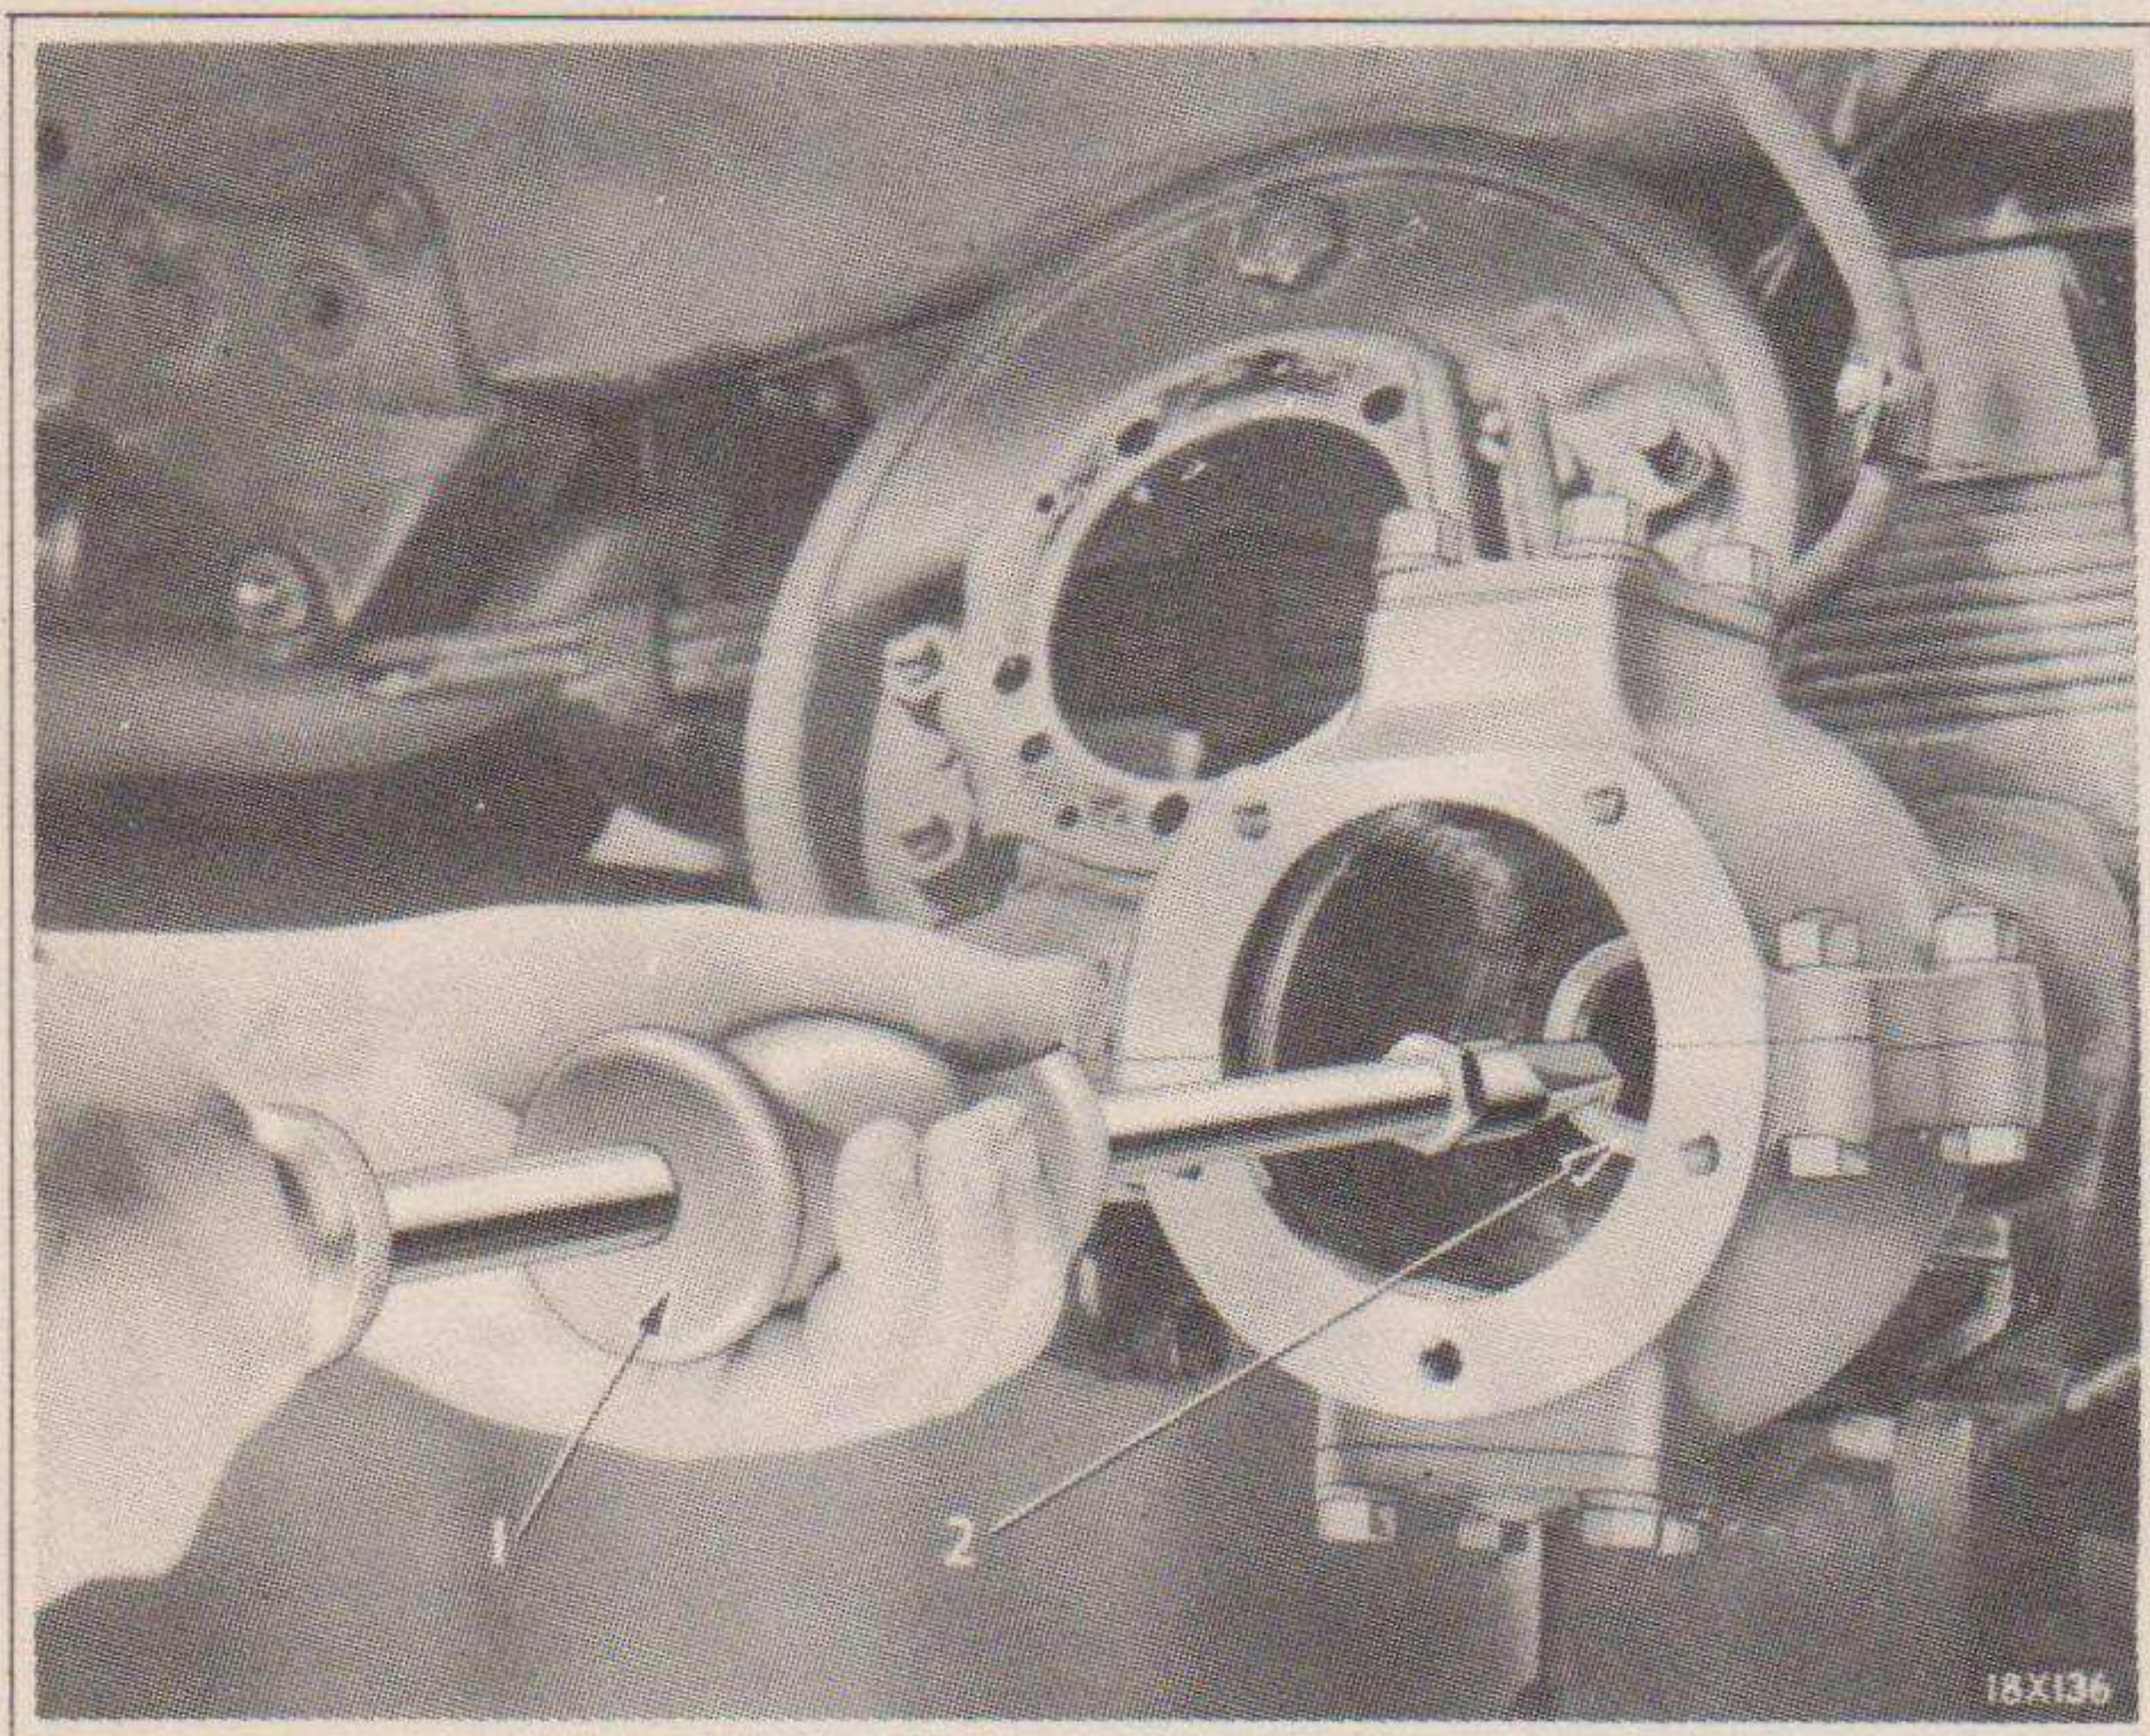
Removing Universal Drive Shaft Oil Seal
